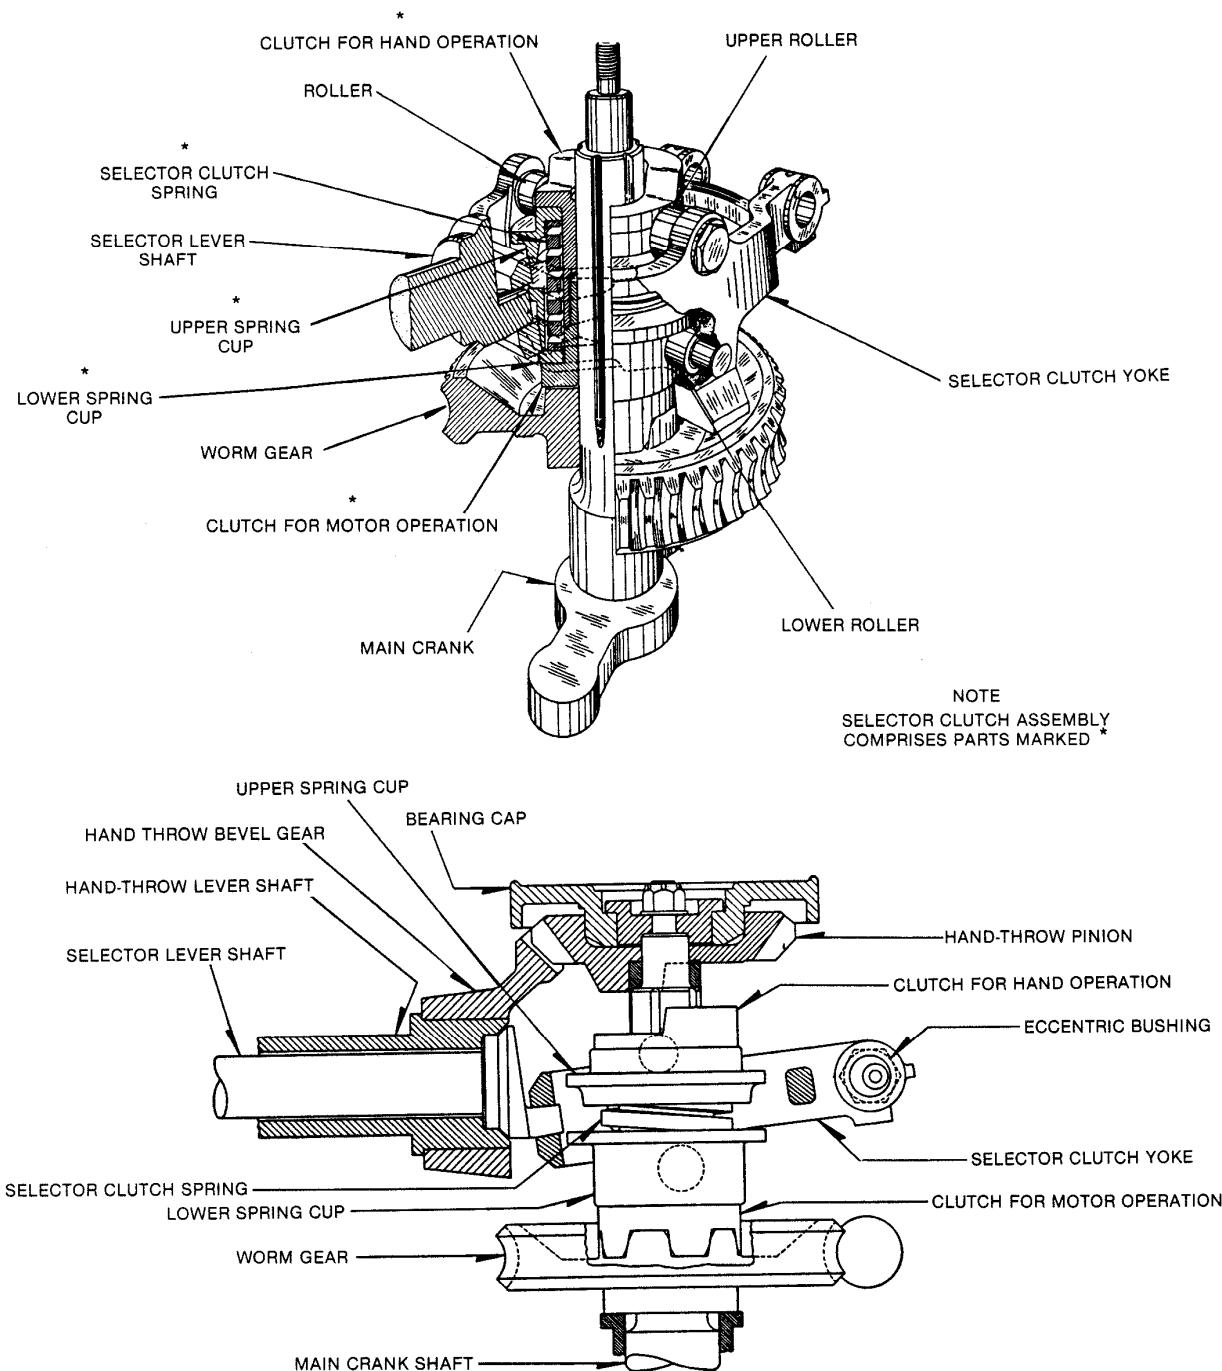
Sectional Views of M-23A Dual-Control Mechanism
